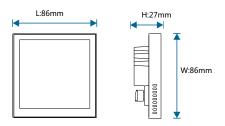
Dimensional Drawing - Front View Figure 3. Dimensional Drawing - Sideview
